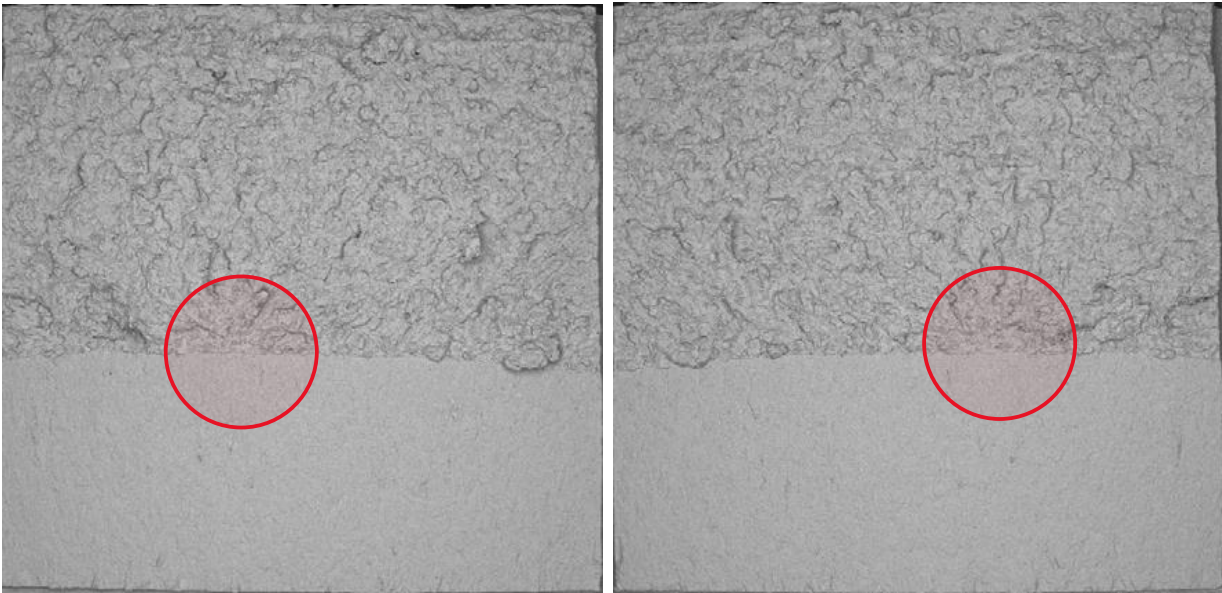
Left and right fracture surface of unirradiated SE(B) specimen B1C.9.9, showing predominantly cleavage fracture. The approximate primary cleavage fracture initiation region is marked by a red circle. The test temperature was -85°C and the fracture toughness was $79.2\text{ MPa}\sqrt{\text{m}}$. Cleavage initiation occurs in a region without special features. Al_2O_3 inclusions were reported close to the side of the specimen and MnS inclusions were found on the fatigue surface. Neither are connected to the cleavage initiation of the specimen.
